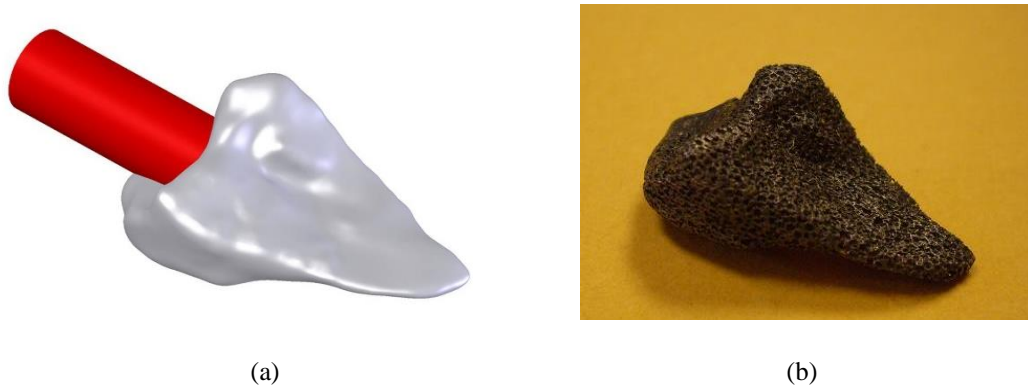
Sample bone implant, (a) CAD file with sacrificial support and (b) finished TM bone fracture fragment
